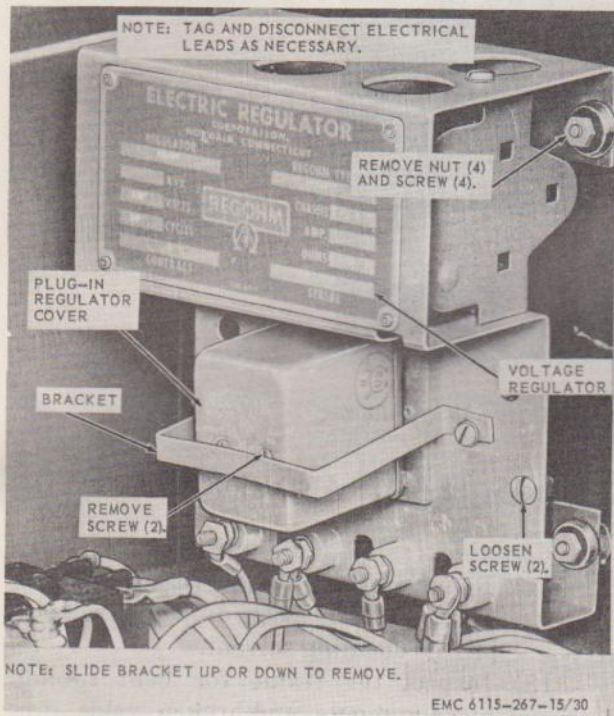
Voltage regulator, plug-in regulator cover and bracket—removal and installation.
